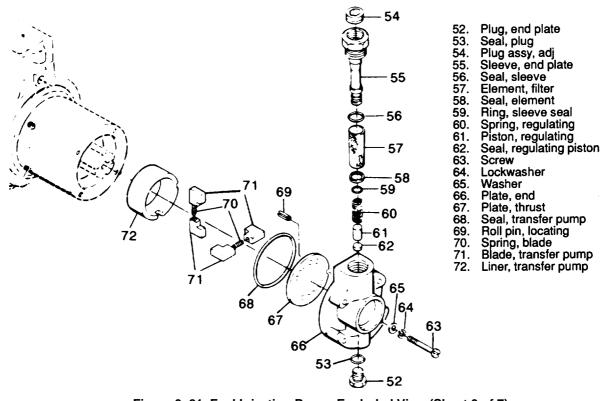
Fuel Injection Pump, Exploded View (Sheet 3 of 7)
